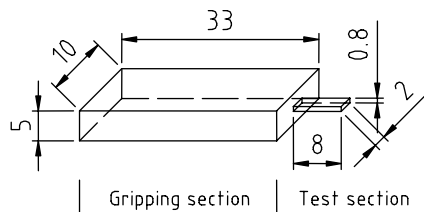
Shape and dimensions (mm) of the test piece used for the bending tests.
